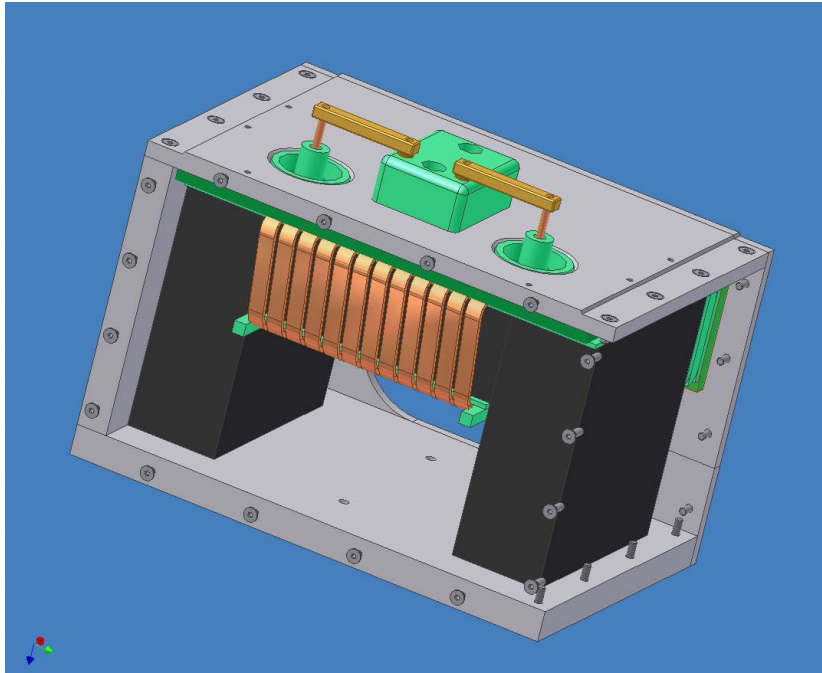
12-turns dump bumper end S8-016A-BDE, front and side covers removed.
